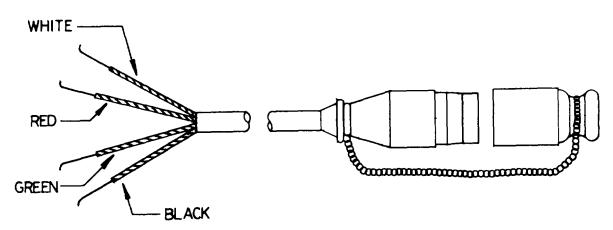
POWER CABLE ADAPTER ASSEMBLY, 230 VOLT.
